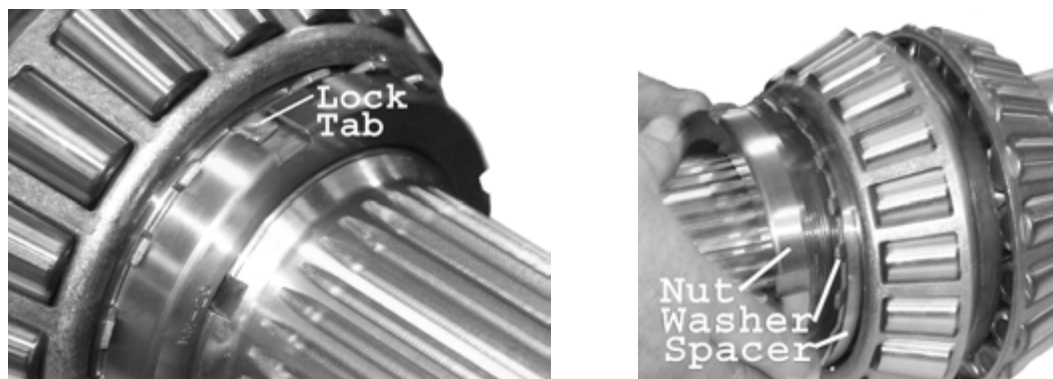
Bend Lock Tab Up, Remove Nut, Washer, and Spacer
